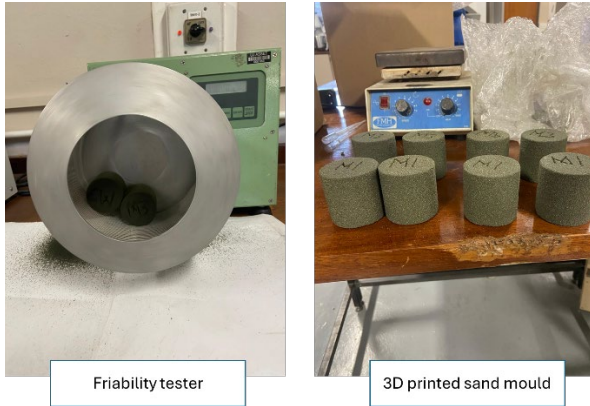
Friability test equipment and the 3D printed sand moulds are shown.
